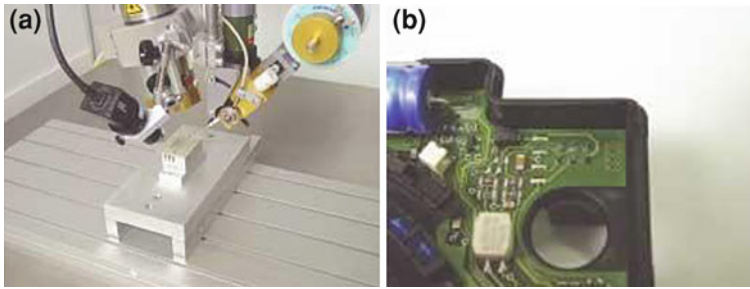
Laser soldering. a Typical set up with laser beam (*middle*), solder wire feeder (*right*) and CCD camera for process monitoring (*left*), and b surface mounted components on the circuit board using laser soldering [53]
